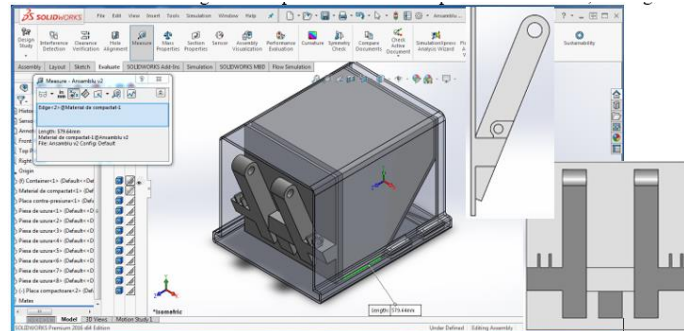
The assembly introduced in the Motion Study module, [56] (with side and rear view of the pressure plate)
